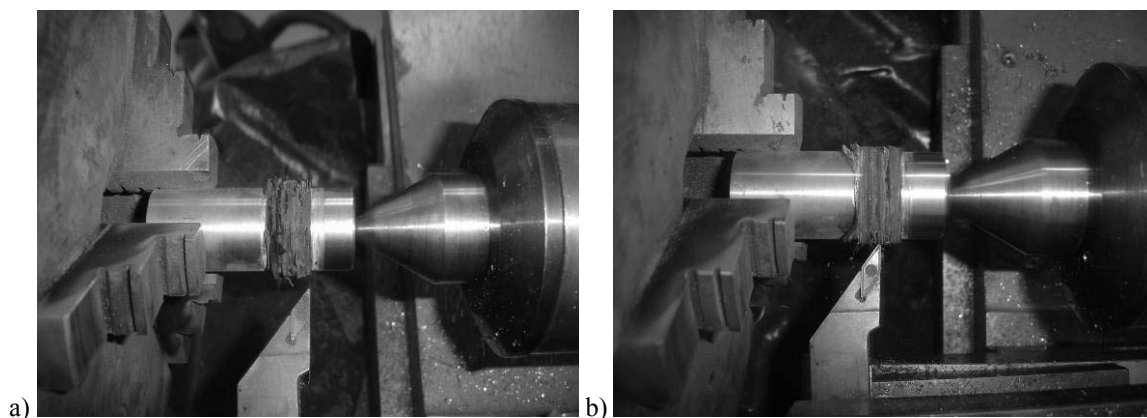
Set of patches tightened in the device (a) and during the machining process (b).
